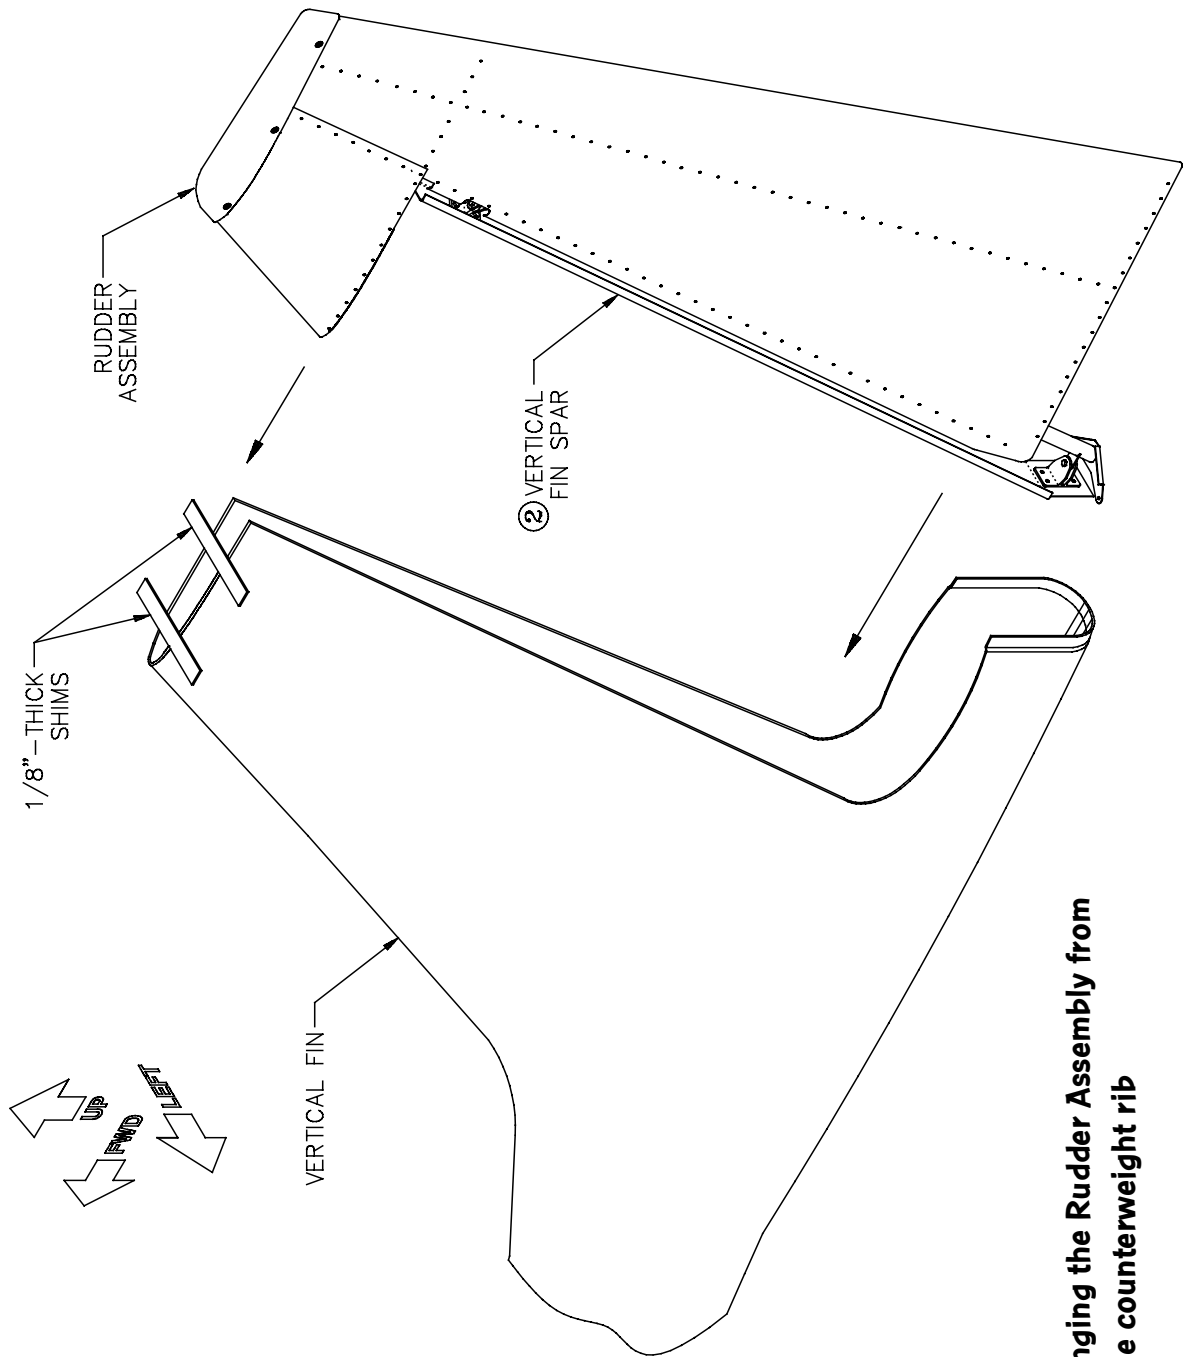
Hanging the Rudder Assembly from the counterweight rib
